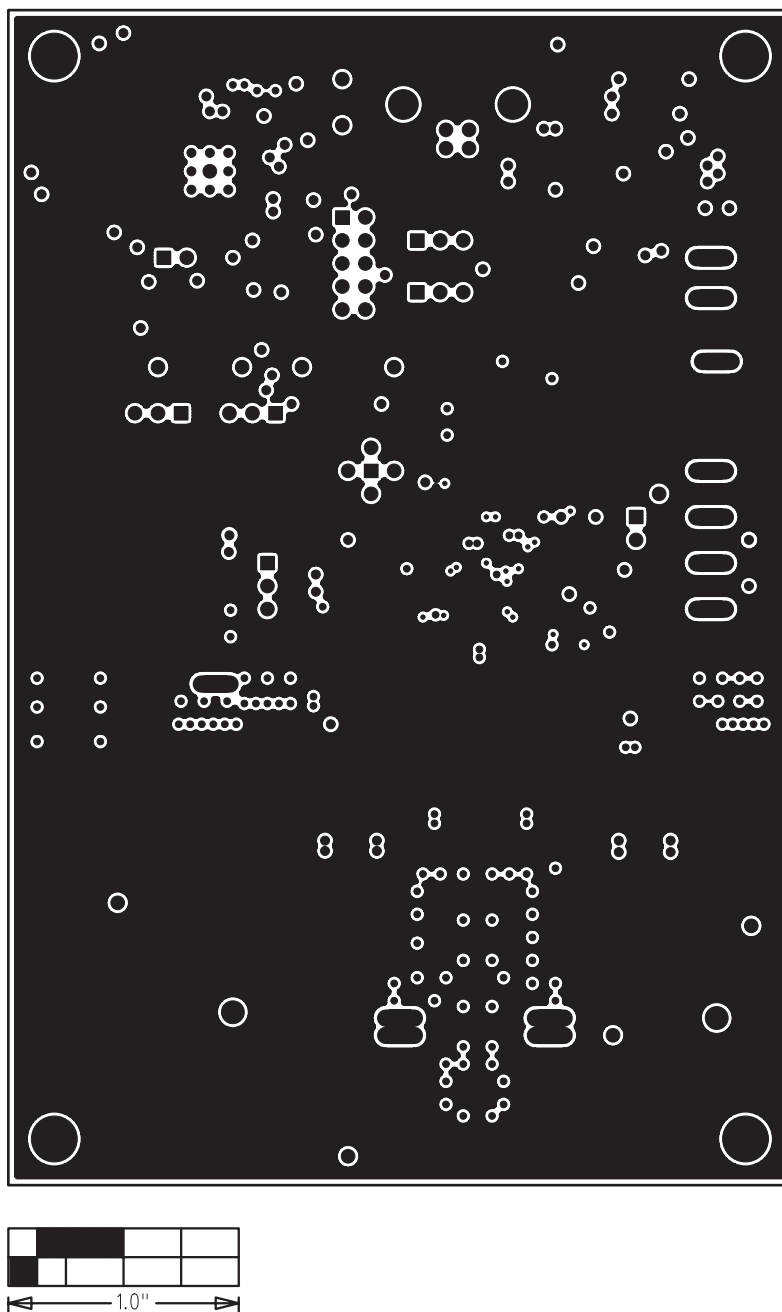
MAX17480 EV Kit PCB Layout—Internal Layer 5
